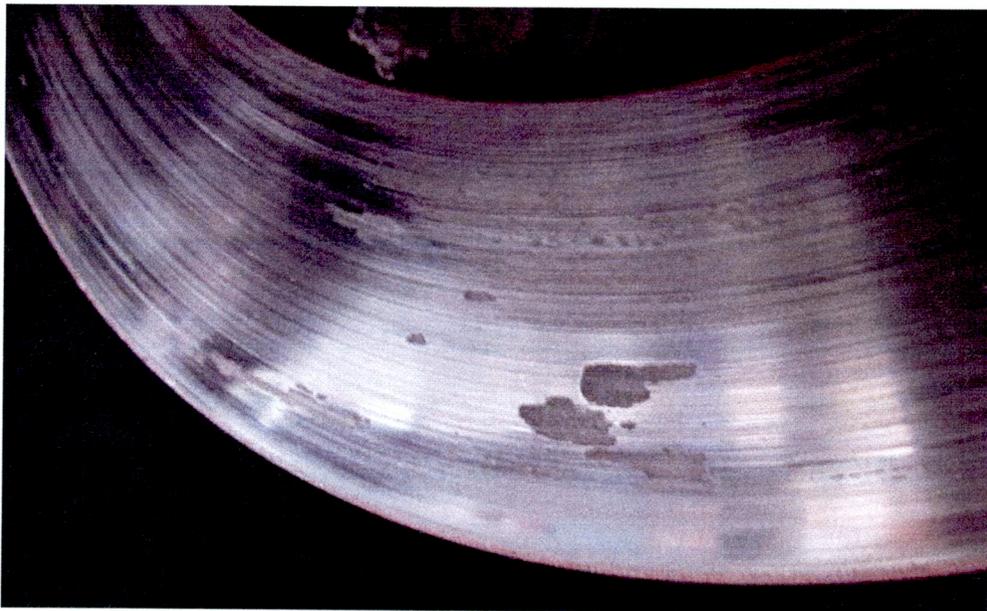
Another View of the Pitting on the Left Front Brake Rotor
